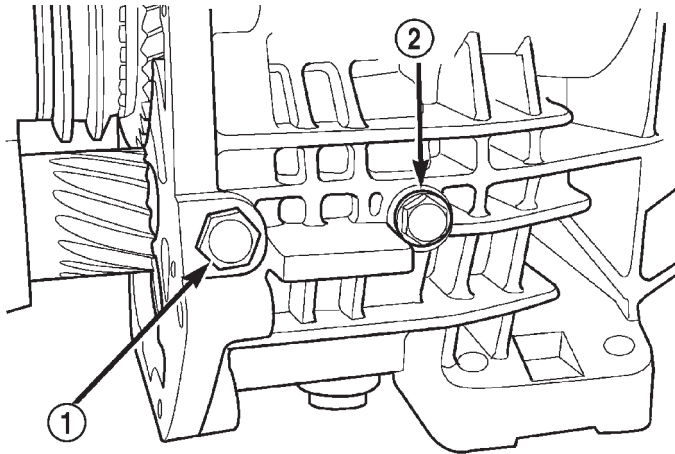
REVERSE IDLER SHAFT/SUPPORT BOLT
